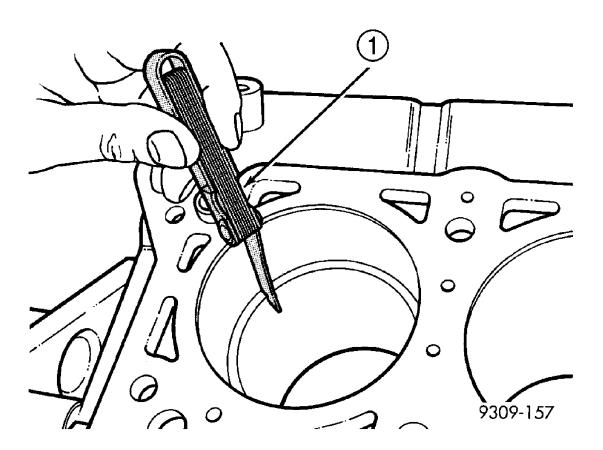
Checking Gap on Piston Rings Courtesy of CHRYSLER LLC
